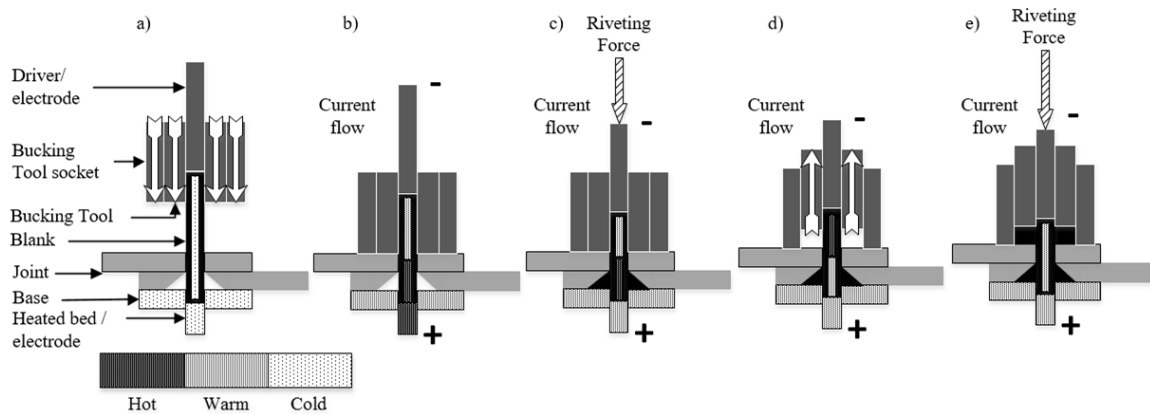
Riveting sequence a) Blank insertion b) Resistive heating c) CSK formation d) Bucking tool opening e) Head formation
